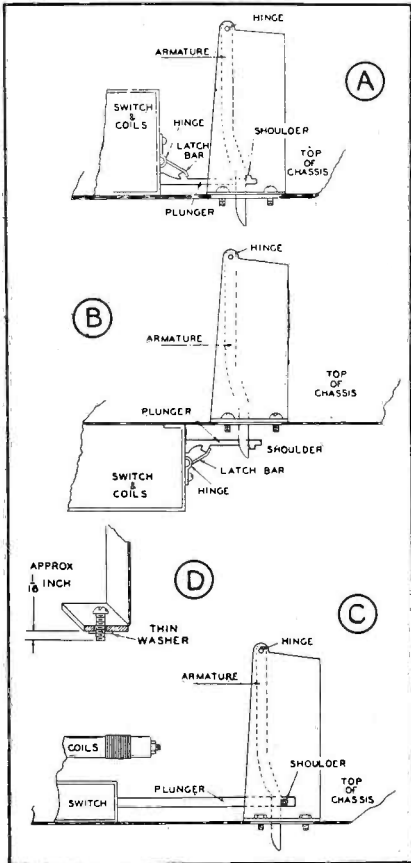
Details for mounting the Airliner remote control magnet assembly.
